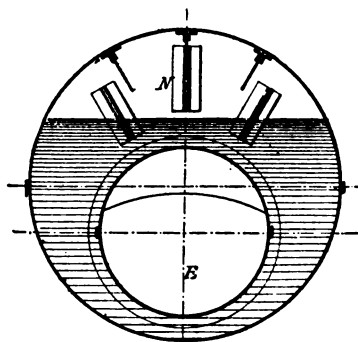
Cornish Boiler: Cross Section. Scale, 1-48th.
